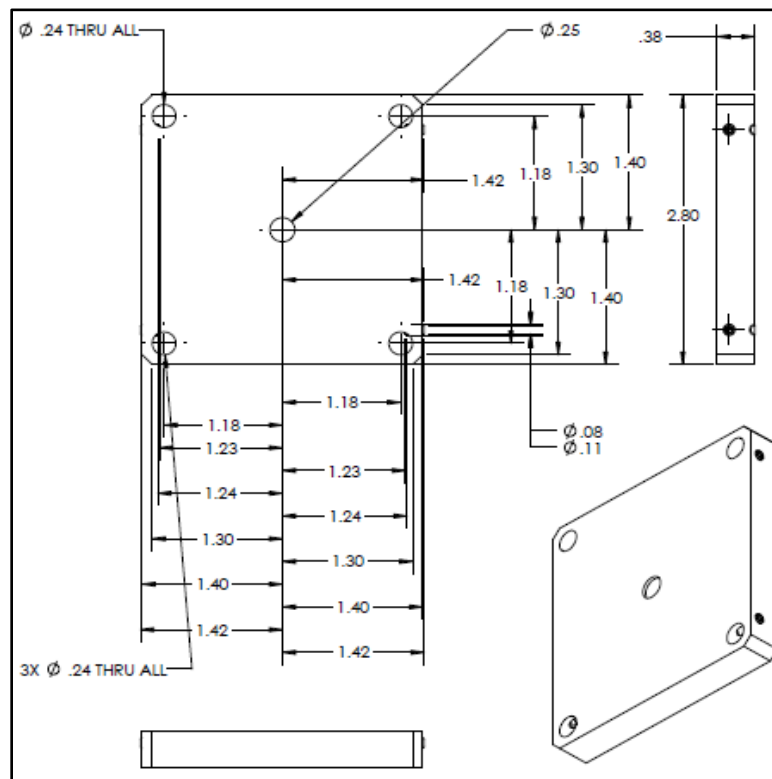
Custom Designed Cage Plate for 6mm Optics Drawing
